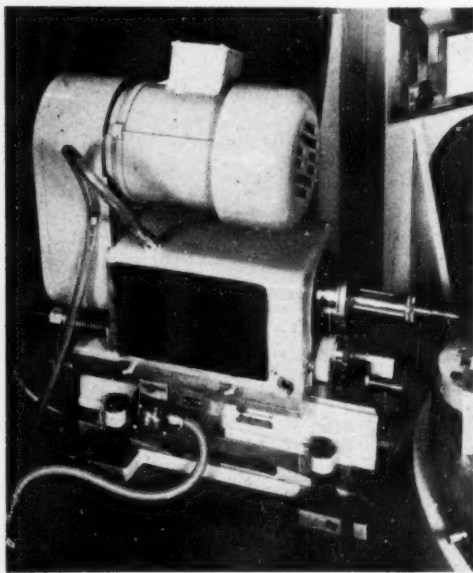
One of the horizontal-spindle cutter heads on the Multifactor machine
